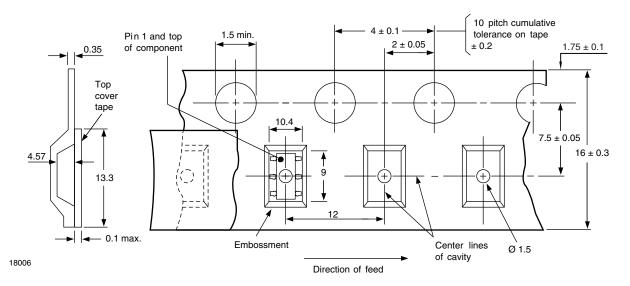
Tape and Reel Packing (1000 pieces on Reel)
